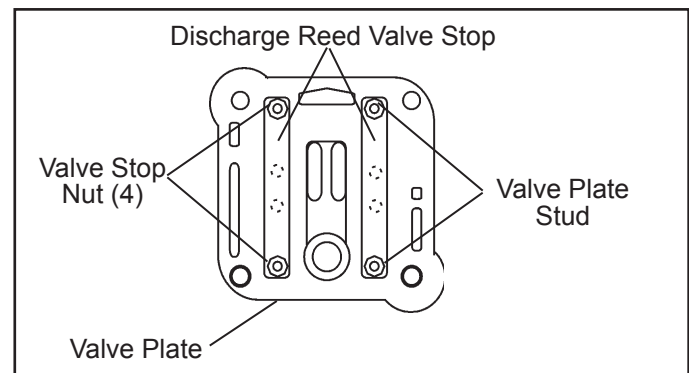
Bendix® BA-921® Compressor Valve Plate
